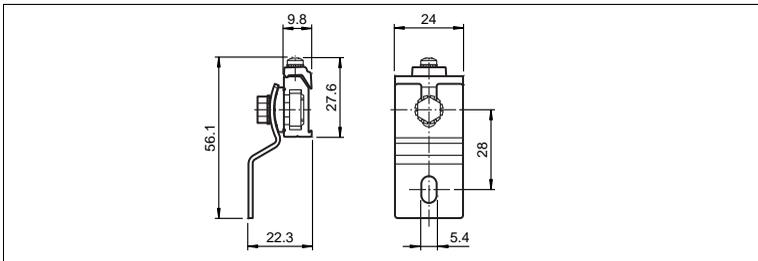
Mounting aid OMH-SLCT-04 (loose bearing)
